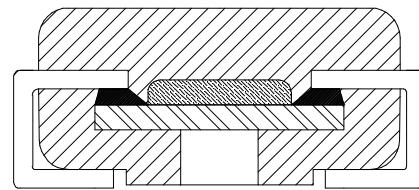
Sectional View of a Reverse J, Surface Mountable Fuse Package.
